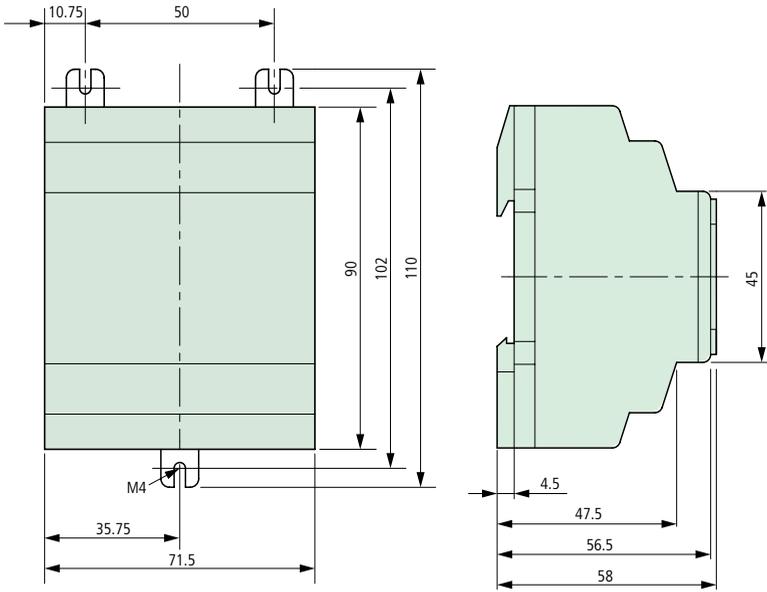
Dimensions CL-LSR/CL-LST in mm
